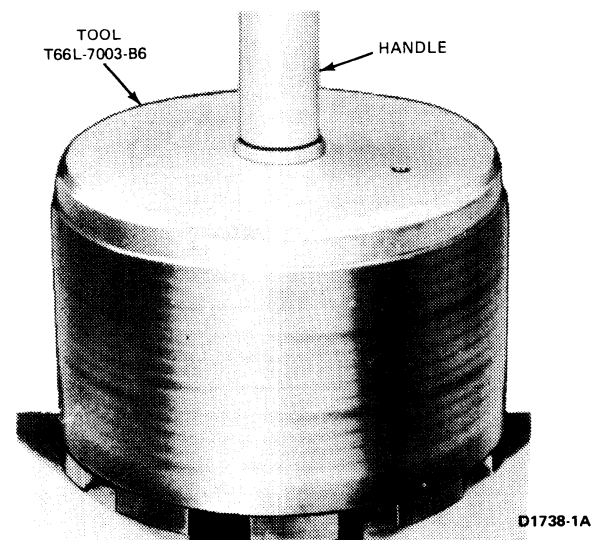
Installing Low and Reverse Brake Drum Bushing
